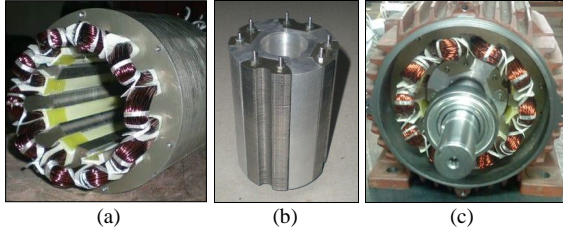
Constructed machine parts: (a) Stator (b) Rotor (c) Prototype ST-SRM assembly.
